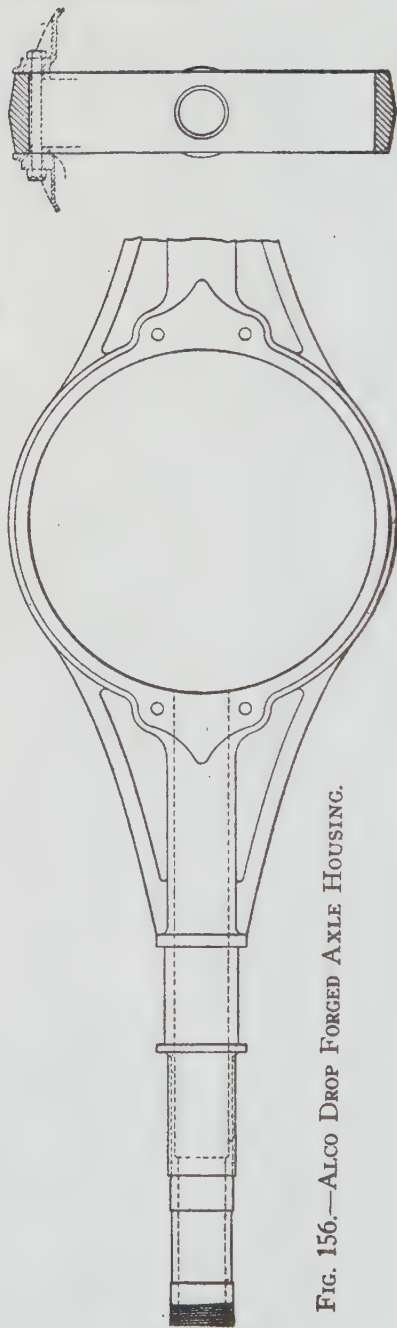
ALCO DROP FORGED AXLE HOUSING.
